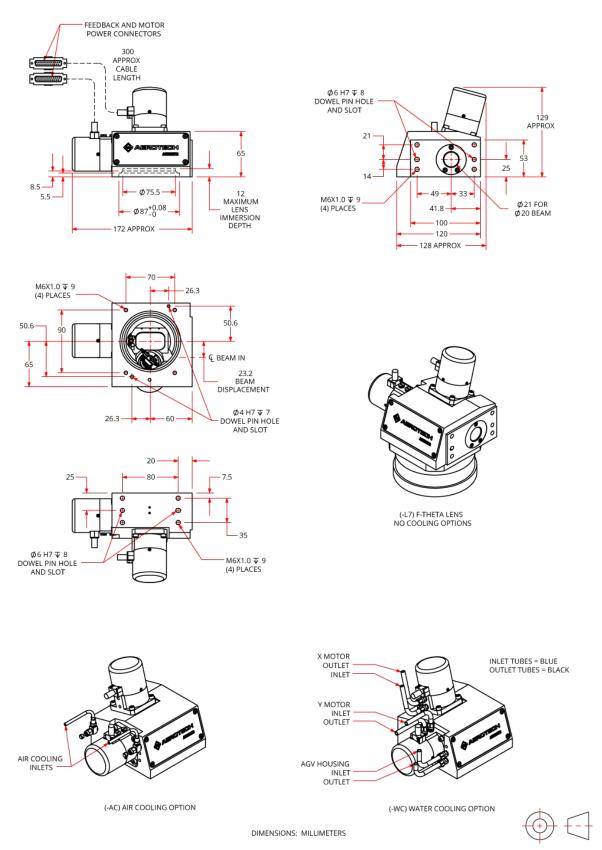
AGV20HPO-BE1 Galvanometer Scanner Dimensions
